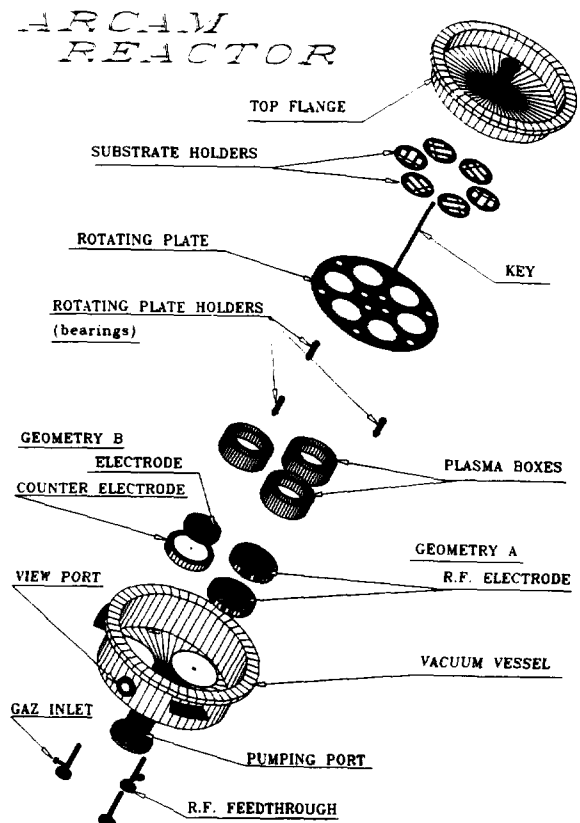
Exploded view of the ARCAM reactor. The heating system and the stepping motor are not shown for the clarity of the drawing.
